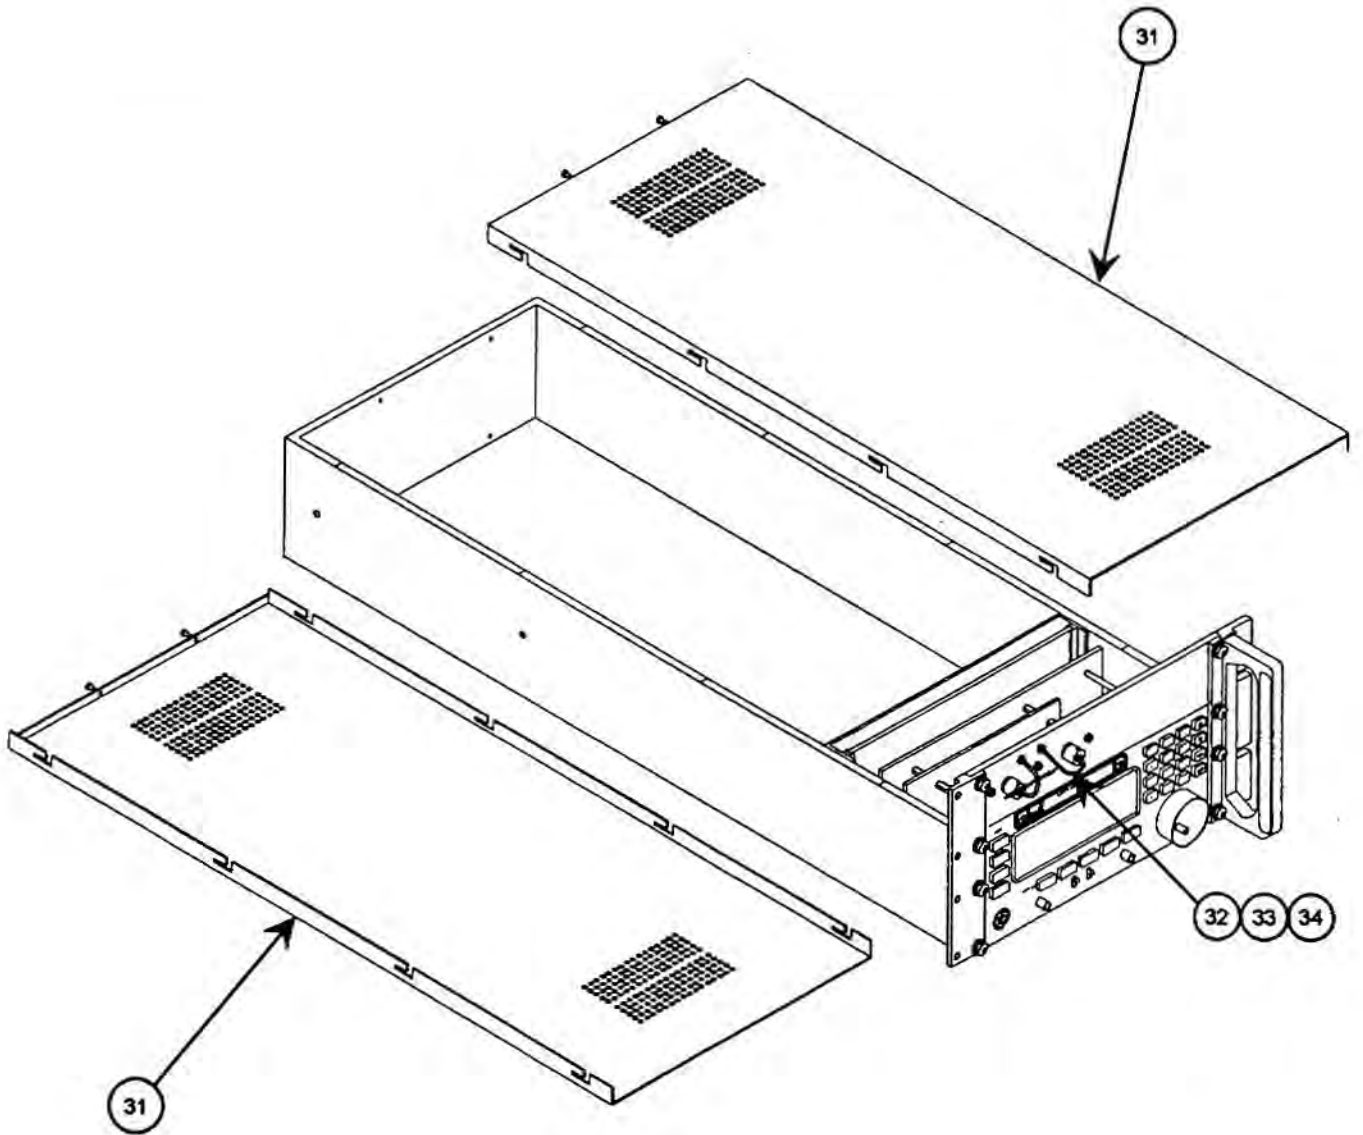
WJ-9902-2 Receiver Controller Assembly Parts Location
